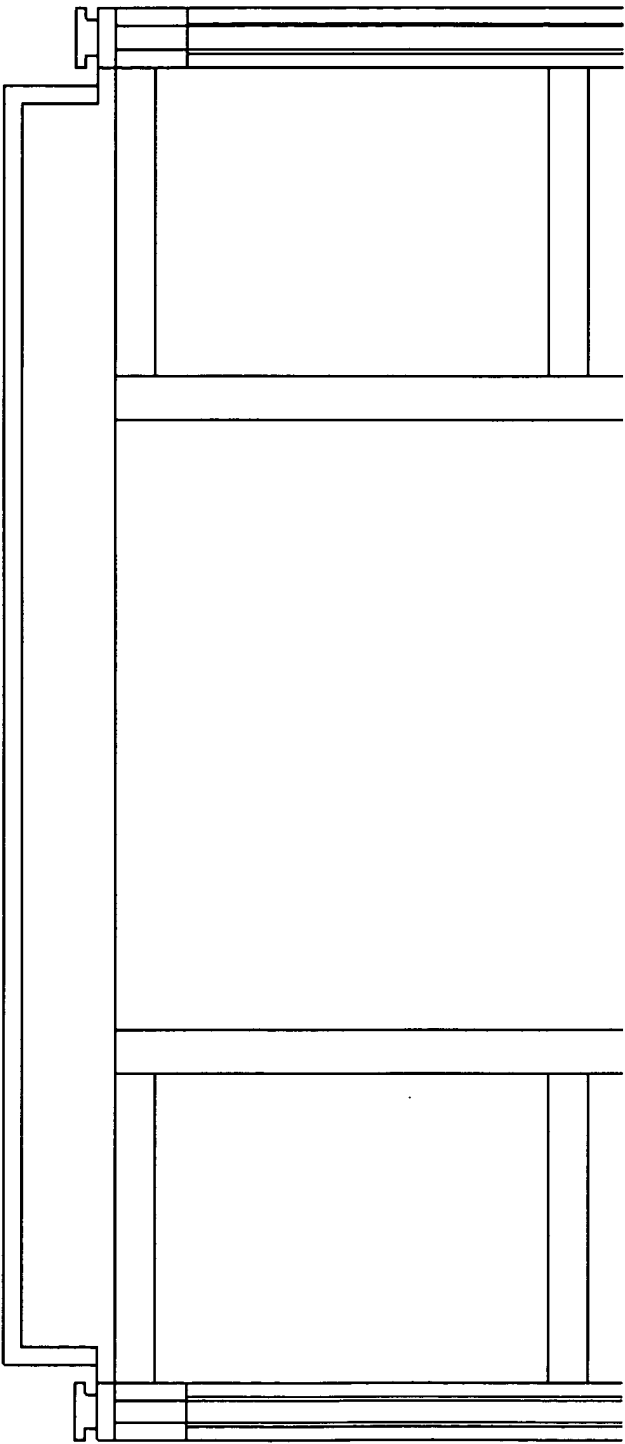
A: Top view of the left end of a floor frame (40 foot collapsible cargo container)
